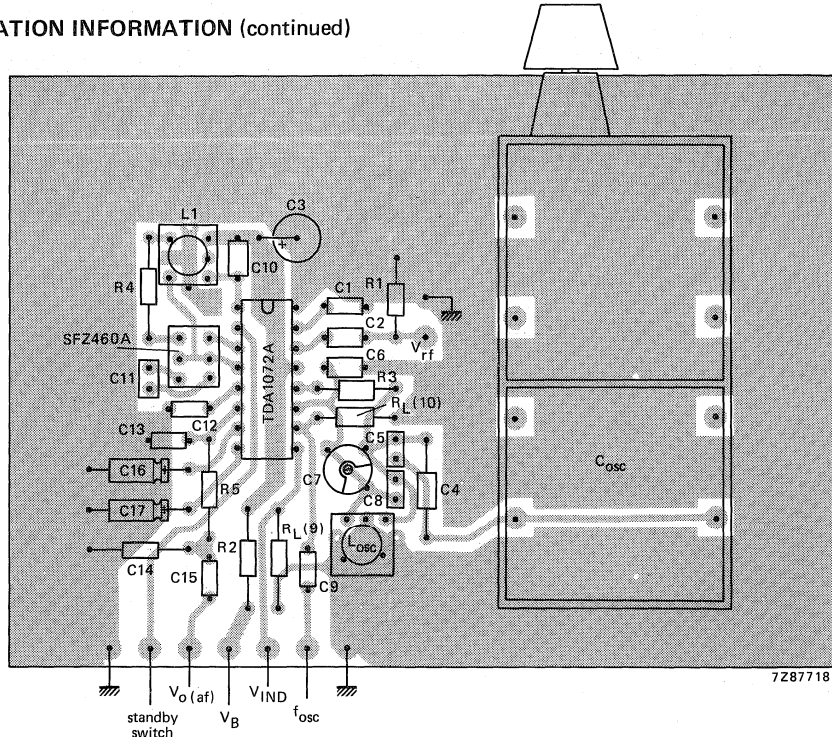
Printed-circuit board component side, showing component layout. For circuit diagram see Fig. 1.
